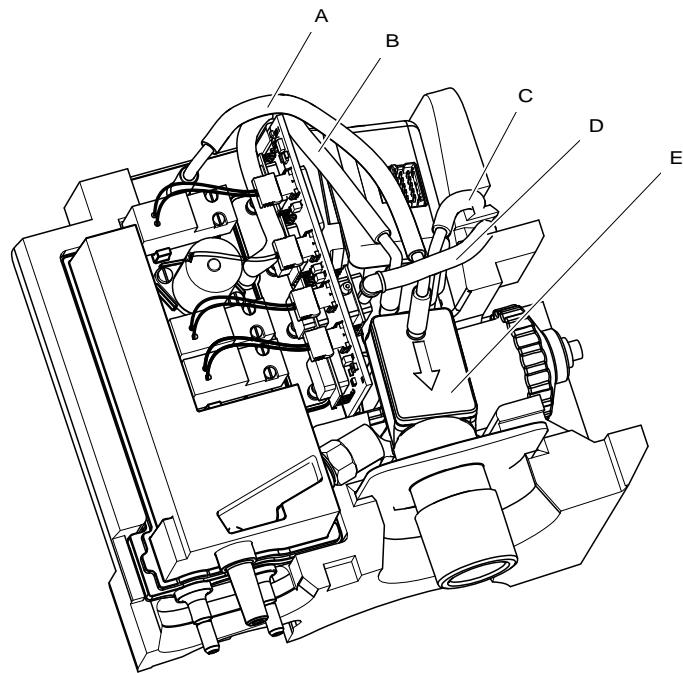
Pressure Sensors Assembly (HAMILTON-C1 since SN6000)
